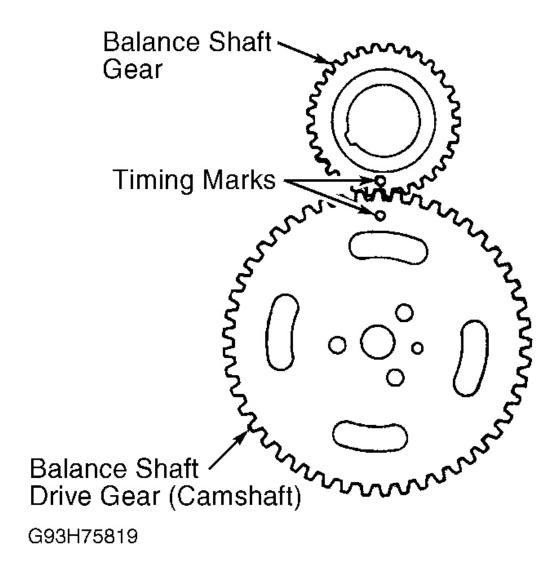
Aligning Timing Marks For Balance Shaft Gears Courtesy of GENERAL MOTORS CORP.
